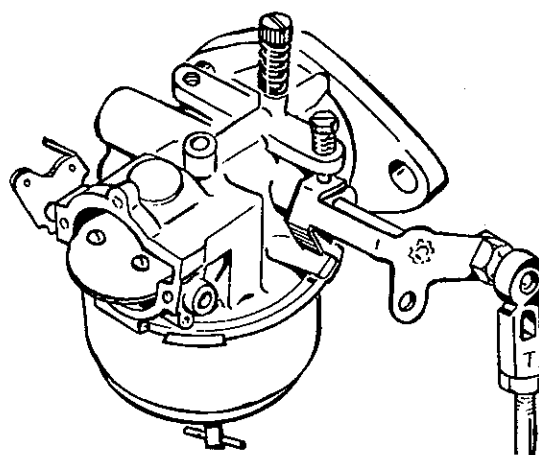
SIDE DRAFT TYPE CARBURETOR
